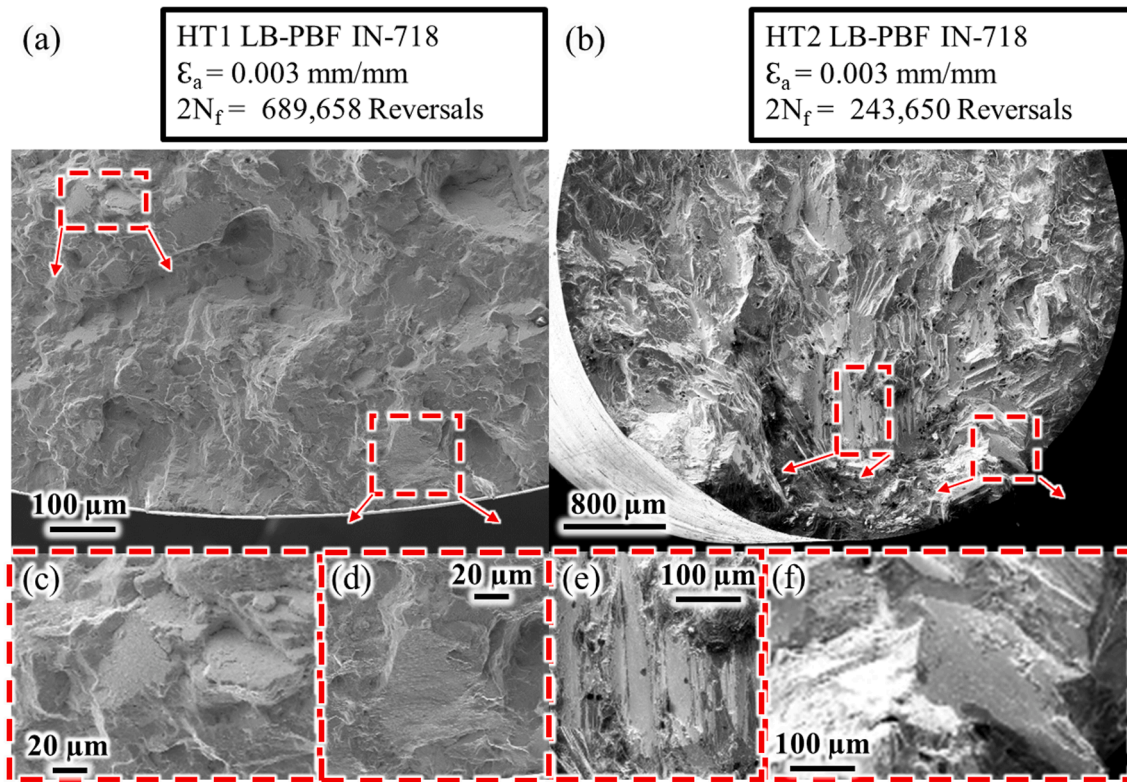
The fracture surfaces of (a) an HT1 specimen, and (b) an HT2 specimen. Selected regions of the fracture surfaces are magnified to provide details of the crack initiation sites in (c-f).
